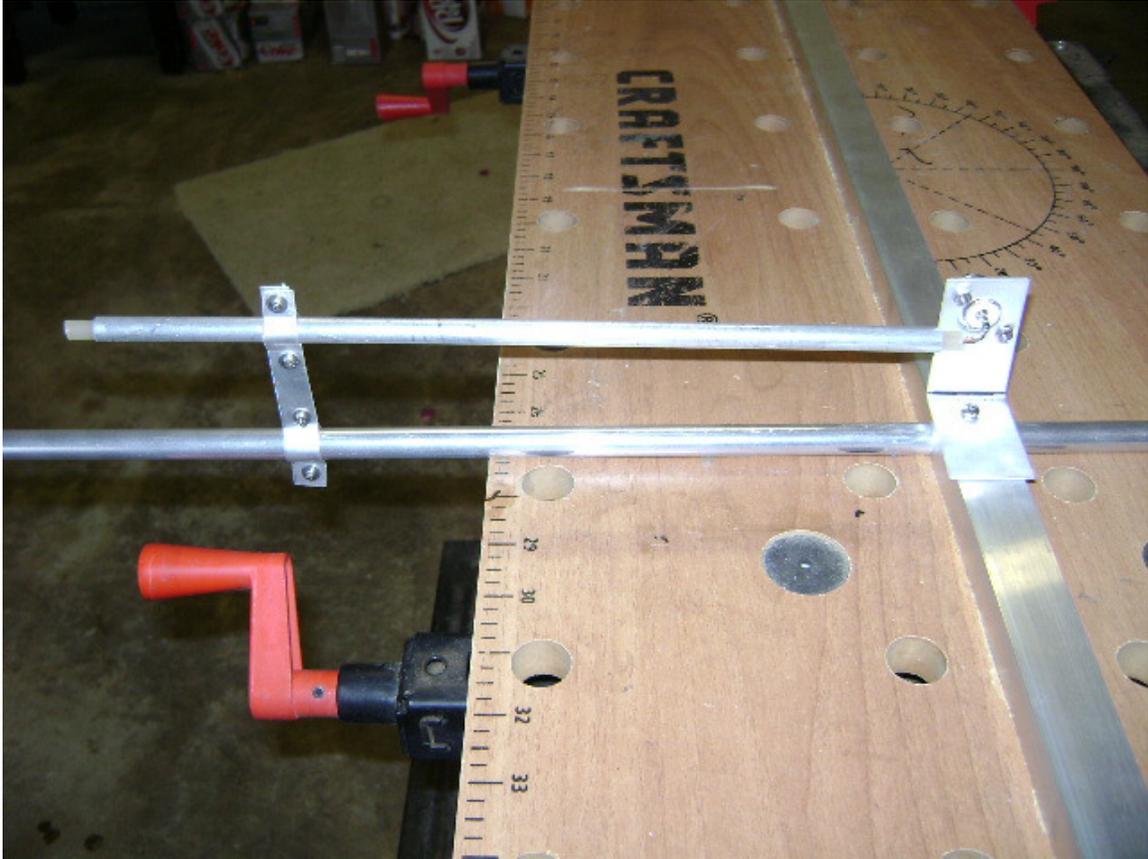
Gamma match assembly to boom installation. The view is looking towards the director.
